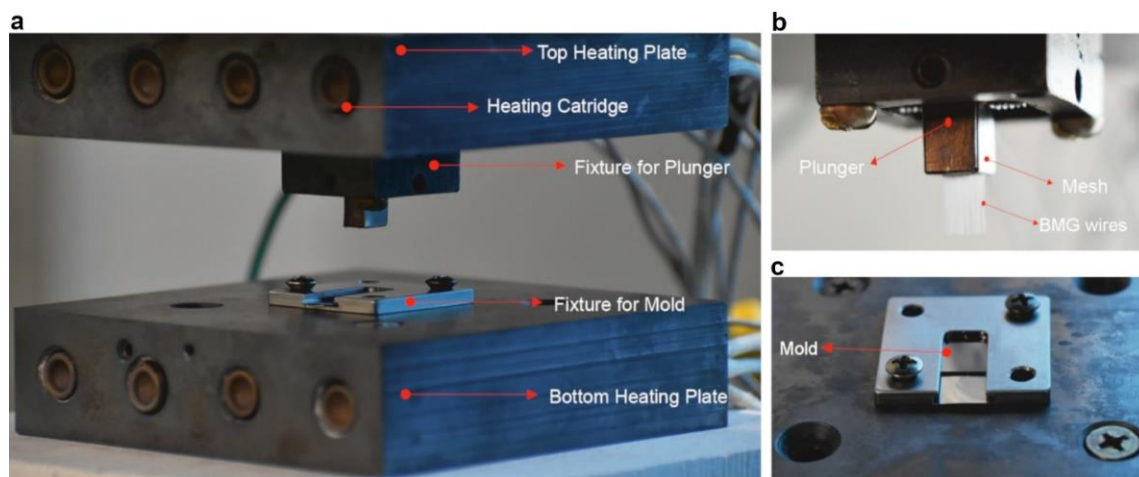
Experimental setup used for BMG thermoplastic drawing. (a) Top and bottom plates heated through resistive cartridges. (b) Closer view of top plunger wrapped in metal mesh showing an array of drawn BMG wires. (c) The metal fixture used to secure the mold on the bottom heating plate.
